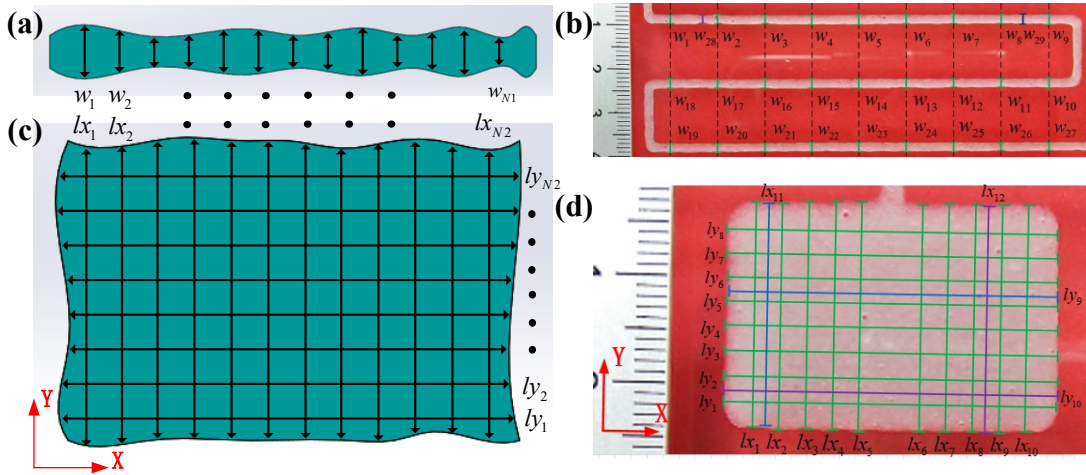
Definition and measurement method of dimensional errors: (a) definition of dimensional errors for printed lines; (b) measuring points setting for printed lines; (c) definition of dimensional errors for printed rectangular objects; (d) measuring points setting for printed rectangular objects.
